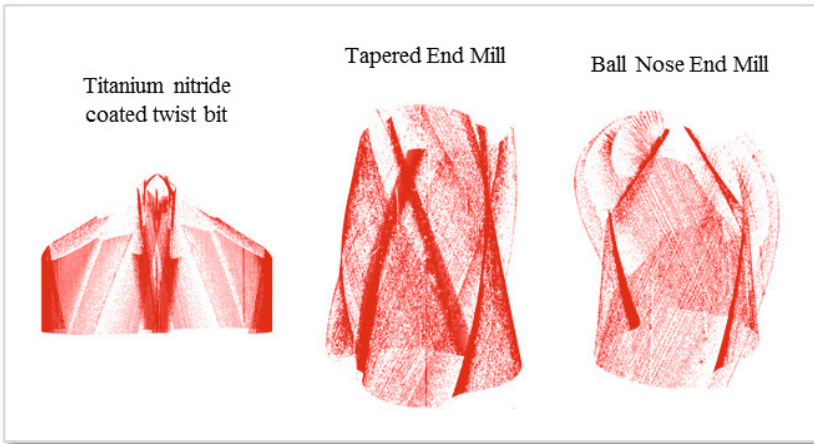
Example of occluded surfaces out of the inspection of a twist drilling bit
